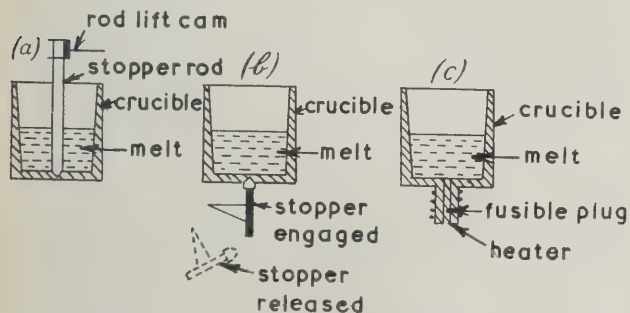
Designs for bottom pouring from vacuum melting furnace
